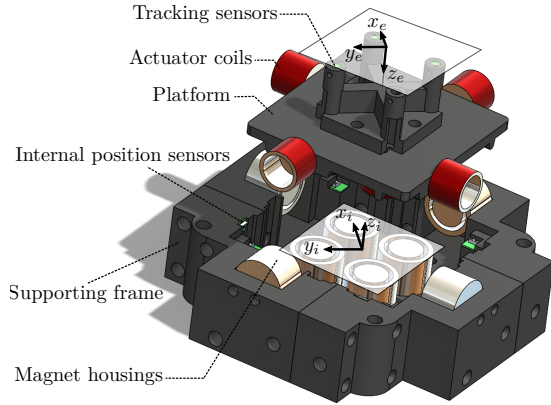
Exploded view of MAGLEV platform prototype. VCAs are used to actuate the platform in six DoFs. Internal position sensors determine the platform position with respect to the supporting frame. A set of three tracking sensors enables the measurement of the out-of-plane position and orientation relative to a sample surface.
